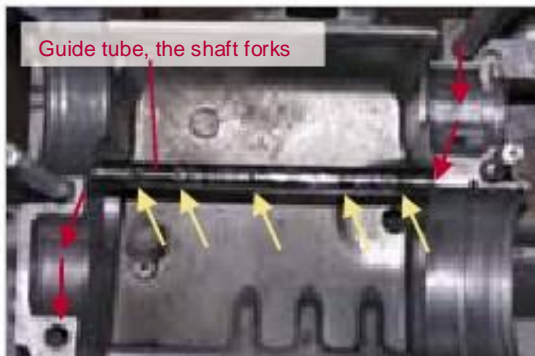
Details: oil pipeline through the Guide tube of the shift forks
